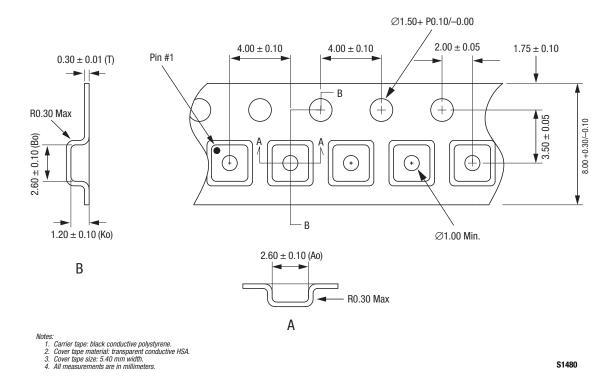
SKY13347-360LF Tape and Reel Dimensions
